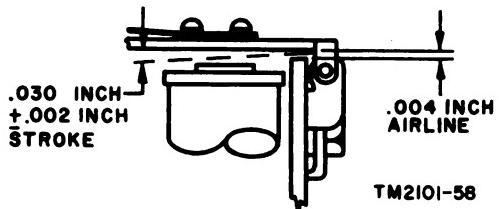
Rotary armature stroke and air line tolerances.
